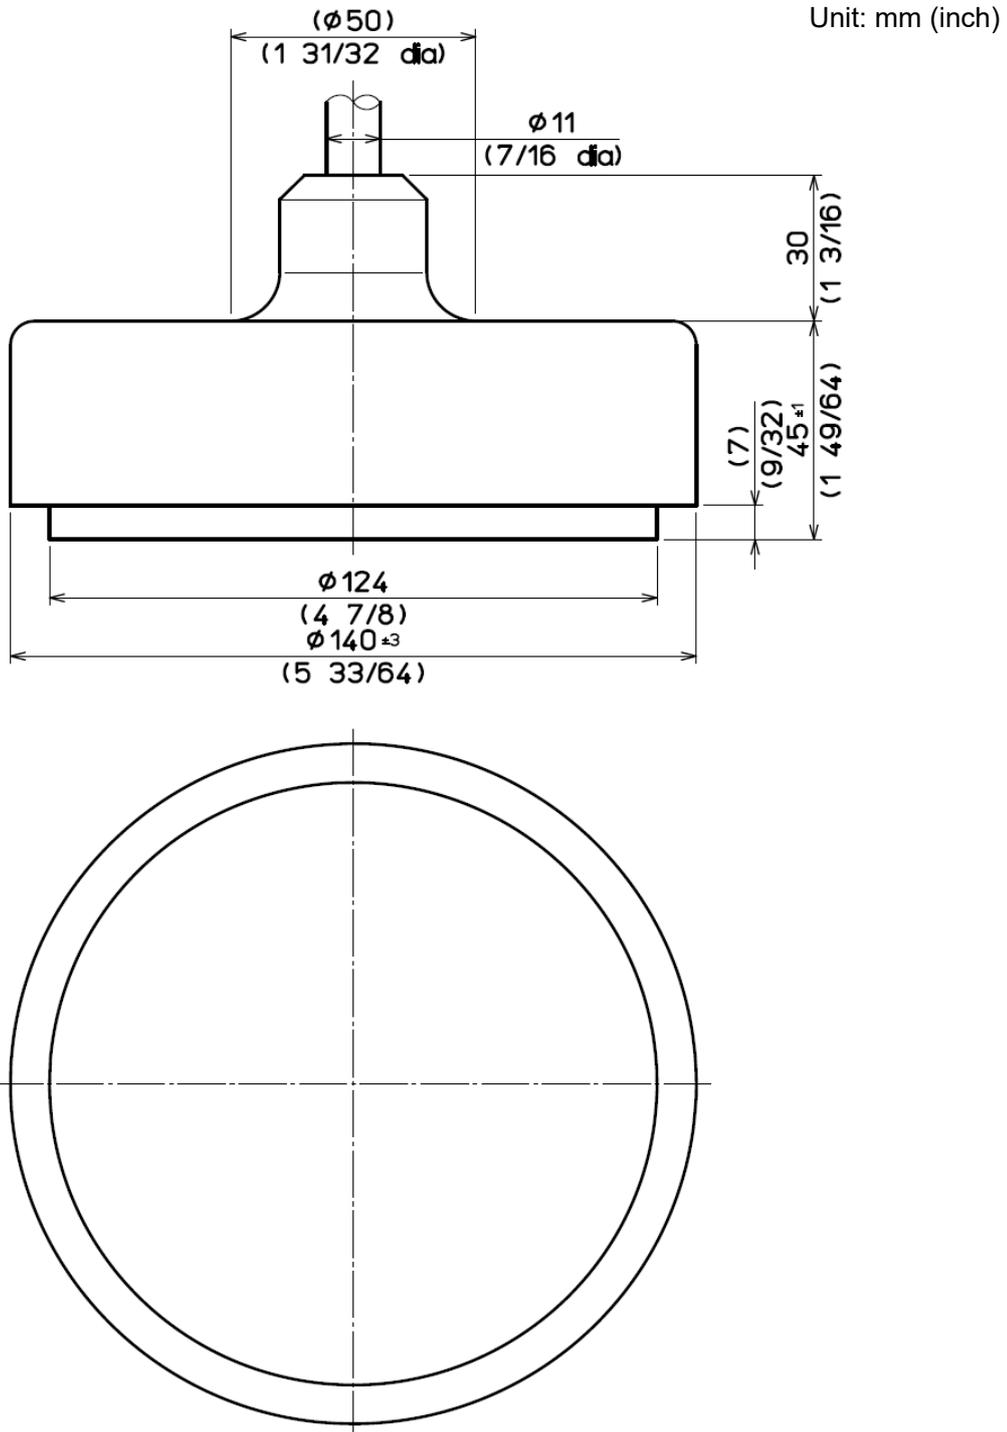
Outline dimensions of a transducer (NGM100-200-12L)
